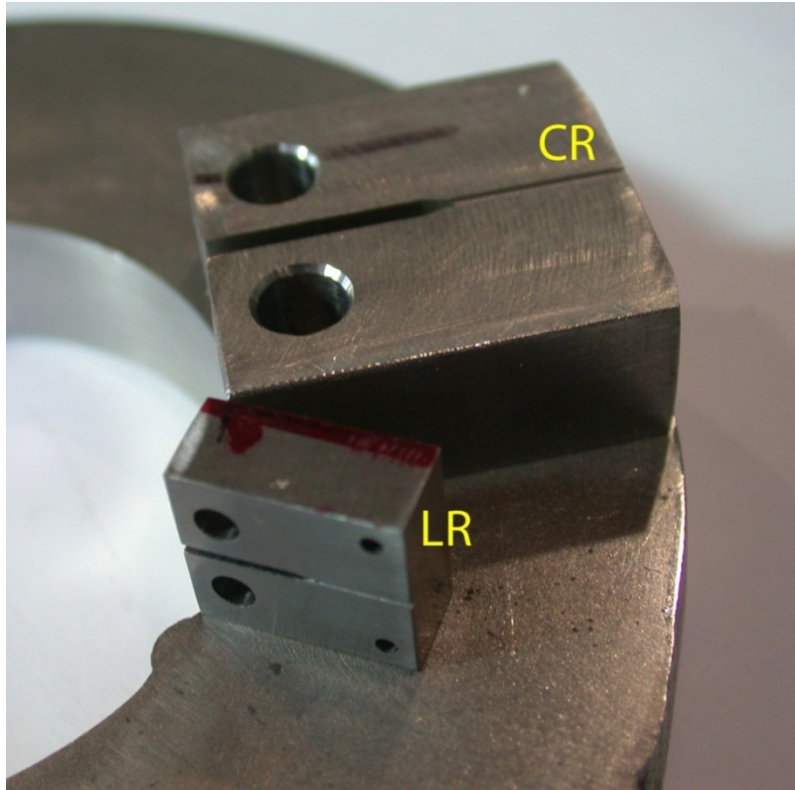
Test specimens in the CR and LR orientation set on top of a ring cut from a CRDM tube containing Alloy 52 welds. The ring was cold-forged to achieve a 20% reduction in thickness.
